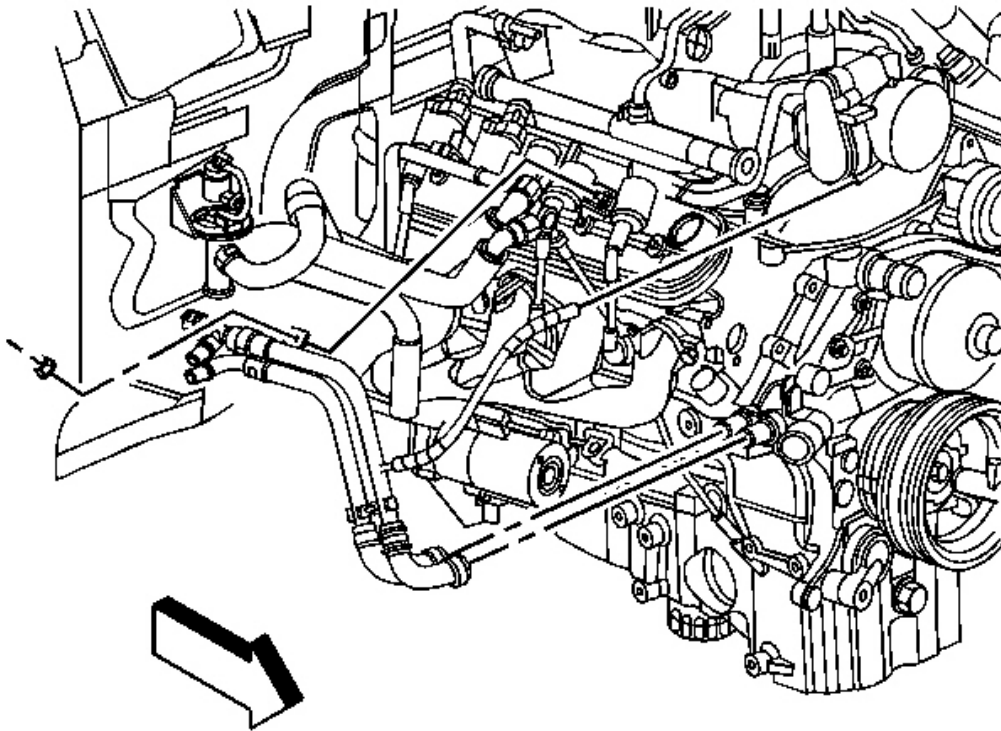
View Of Auxiliary Heater Inlet & Outlet Hoses/Pipes
